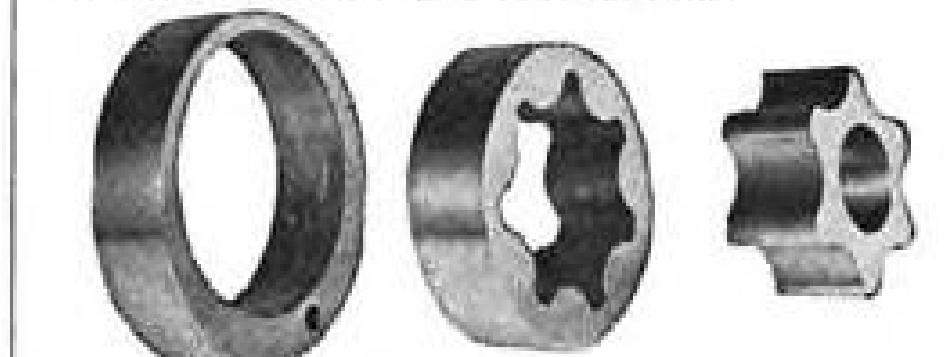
Three Gerotor components permit pump to be incorporated as integral part of housing or frame of mechanism, eliminate need for purchase and mounting of separate, complete pump.
